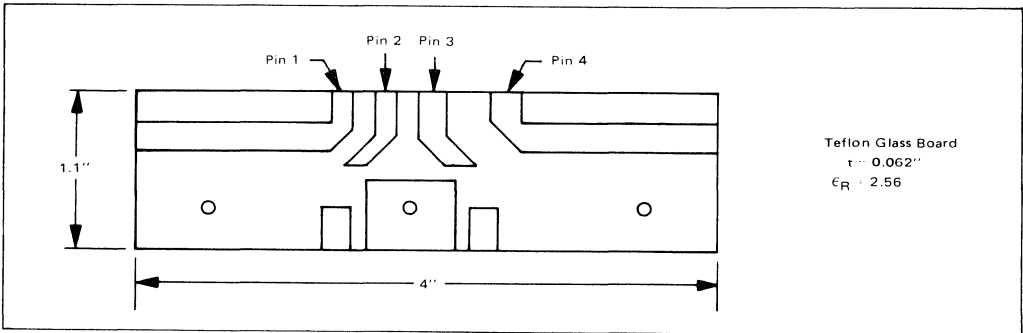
UHF POWER MODULE TEST FIXTURE
